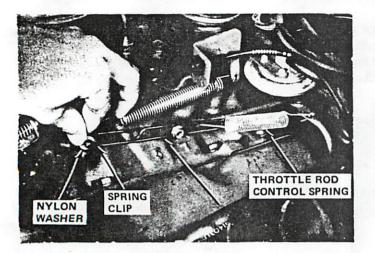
C-33 Installing Nylon Washer and Spring Clip— Eight-Cylinder Engine
